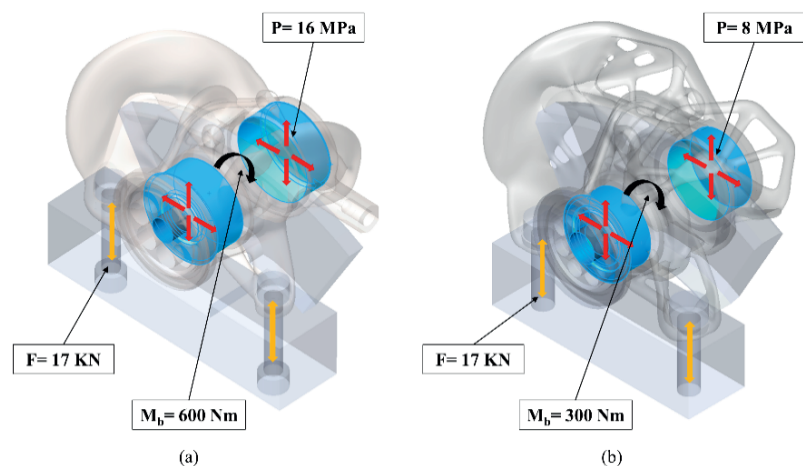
The used assemblies for the validation studies with their loads and boundary conditions: (a) Assembly of the front caliper, (b) Assembly of the rear caliper.
